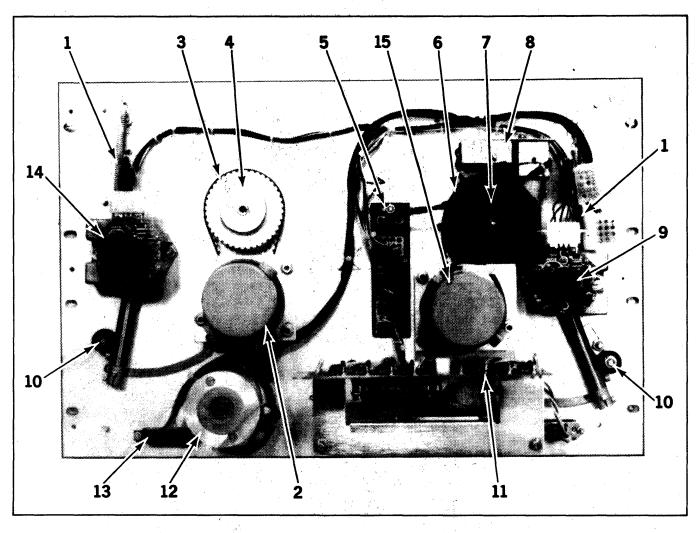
Model 9832 Chassis: Rear View (Power Supply Removed)
